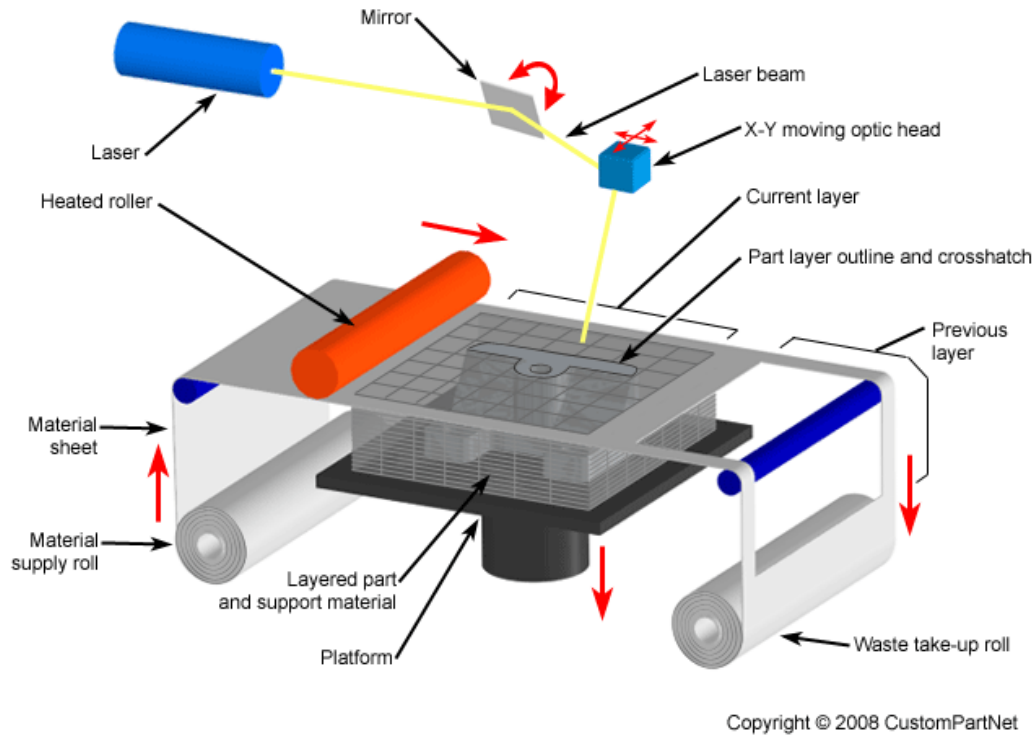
Example of Laminated Object Manufacturing (LOM) 3D printing technology [34].
